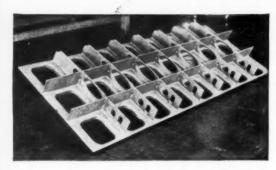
Welded sub-assembly, with all welding readily accessible,
